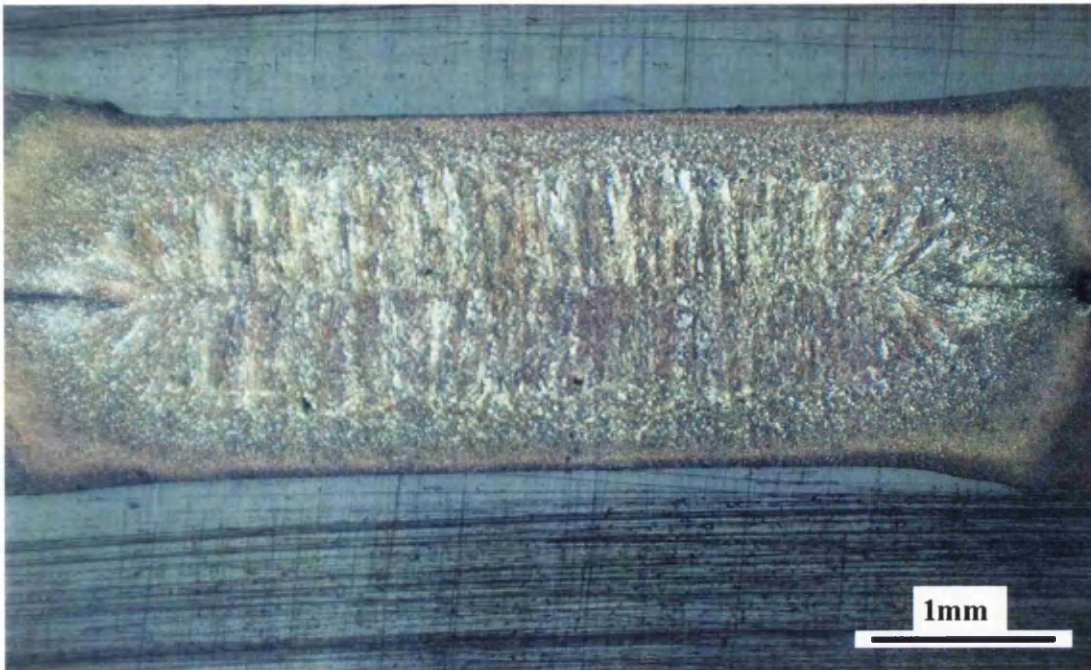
Macro of 5√f spot weld formed in 1.0mm MS1400
